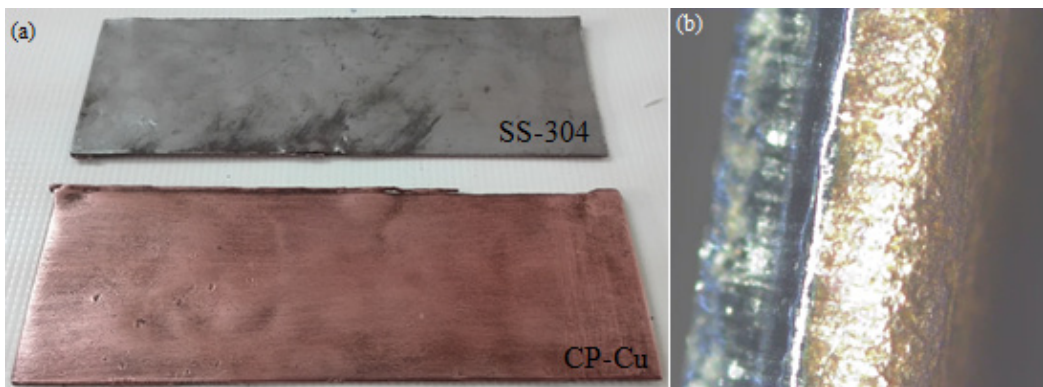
(a) Real view of Cu-SS two-layer sheet after explosive welding process, (b) Microscopic image of the thickness of Cu-SS two-layer sheet.
